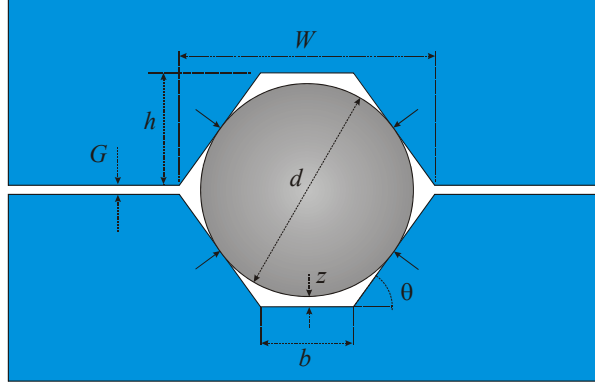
Cross-section view of v-groove microball bearings showing geometrical design parameters
